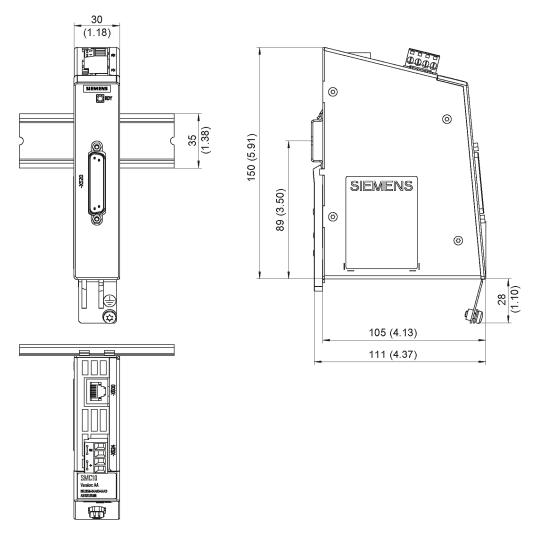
Dimension drawing of the Sensor Module Cabinet SMC10, all dimensions in mm and (inches)
